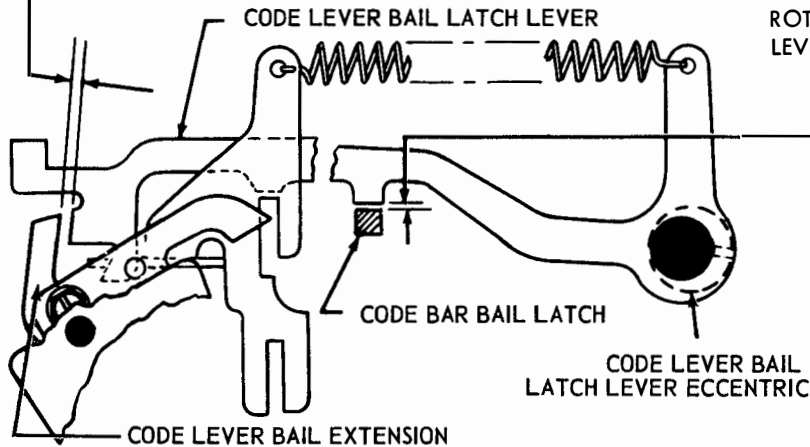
Keyboard, Code Lever Bail Latch Mechanism, Left Side View
